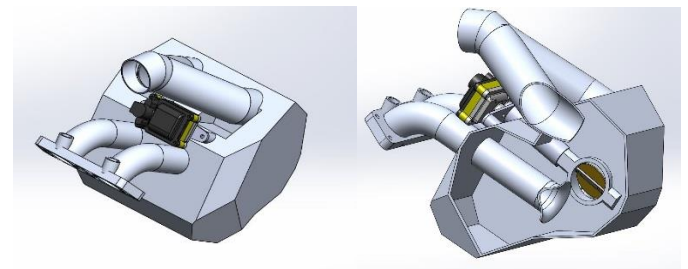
Model and section view of the optimized variable geometry intake manifold.
